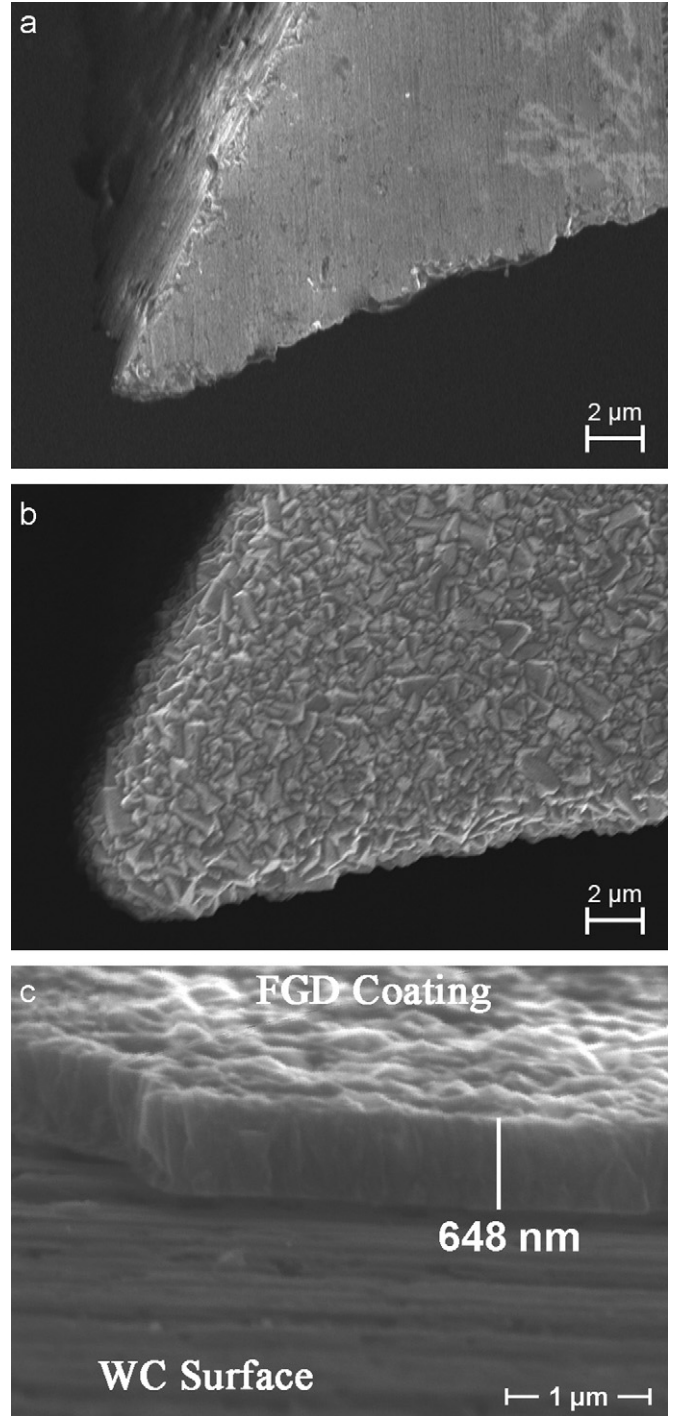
SEM micrographs of unused micro end mill cutting tips: (a) uncoated tool, (b) FGD-coated tool, and (c) FGD coating thickness.
